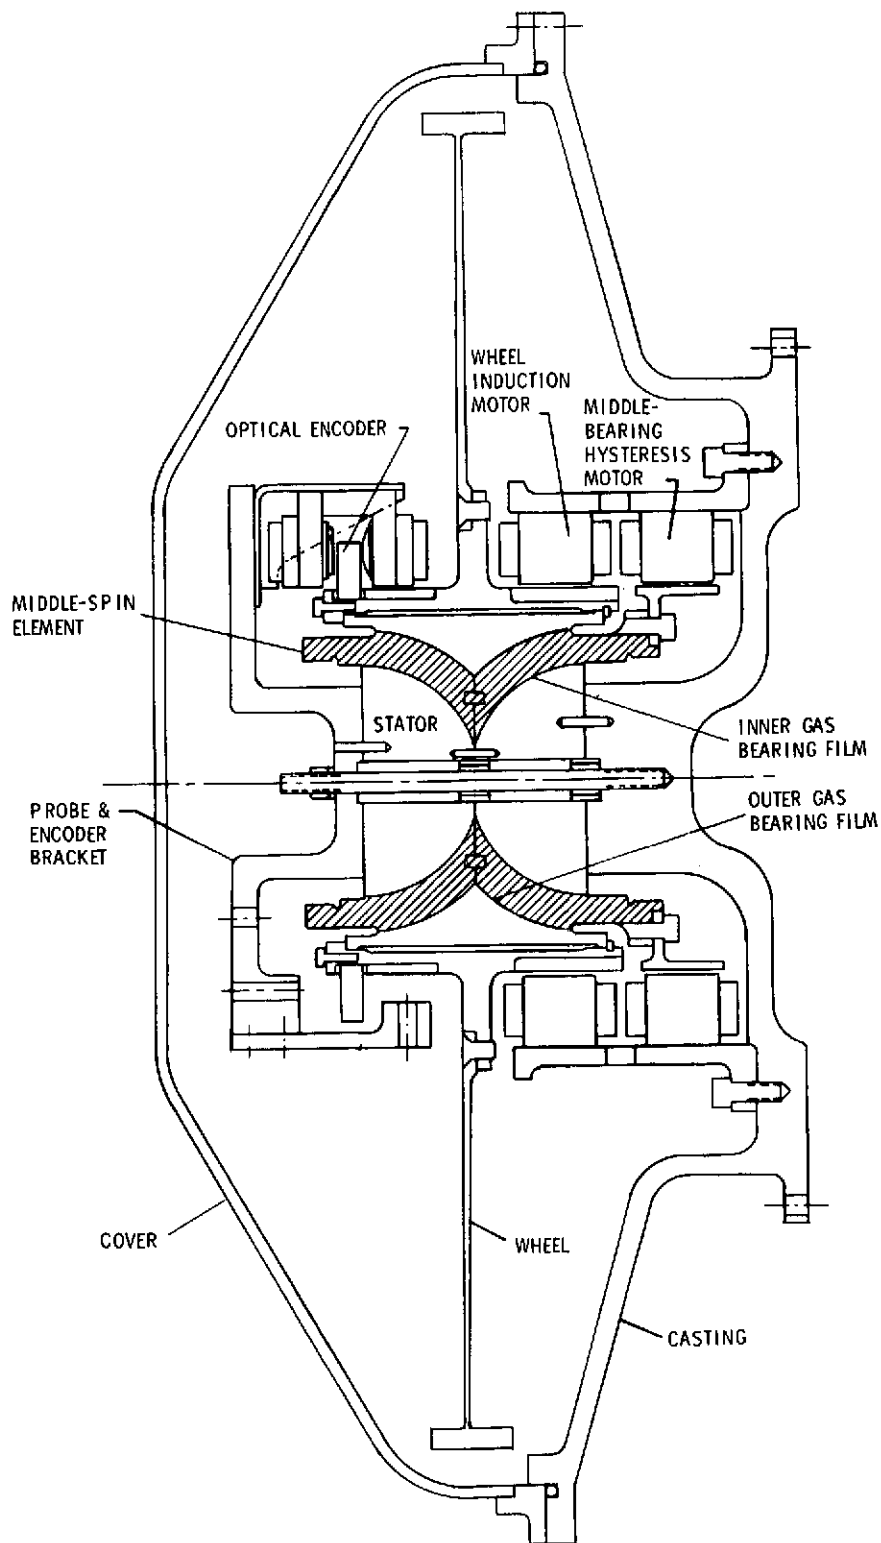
Cross Section of Dual Spin Gas Bearing Reaction Wheel
